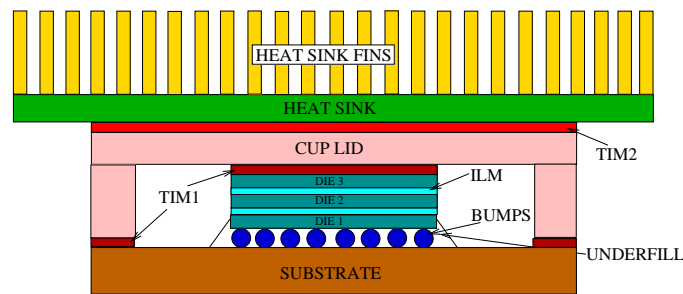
Cross-Sectional view of a modern 3D Flip-Chip package with 3 stacked dies.
